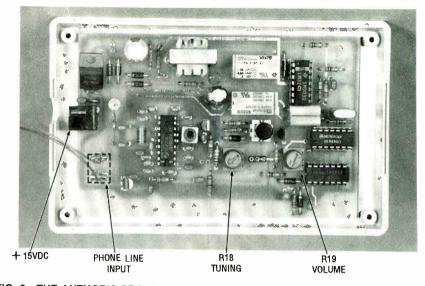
THE AUTHOR'S PROTOTYPE. Do not use an IC socket for IC4, and be careful when soldering it as excessive heat can damage the chip.
